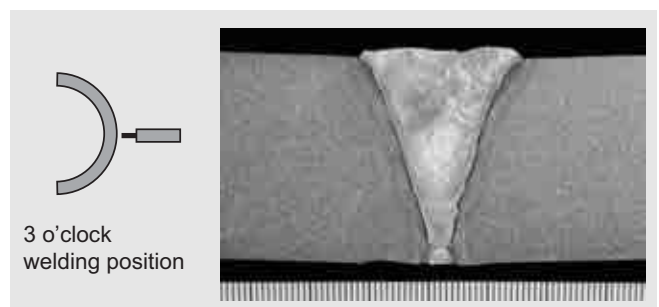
Macrostructure of 3 o'clock position weld bead
